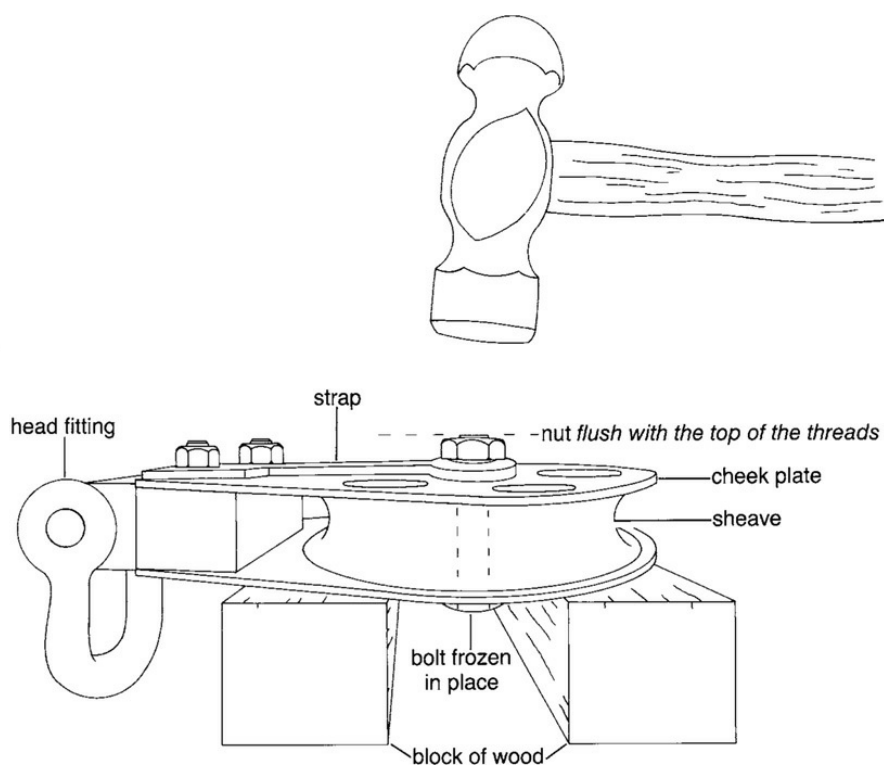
Removing a corroded-in-place sheave bolt. (Jim Sollers)
